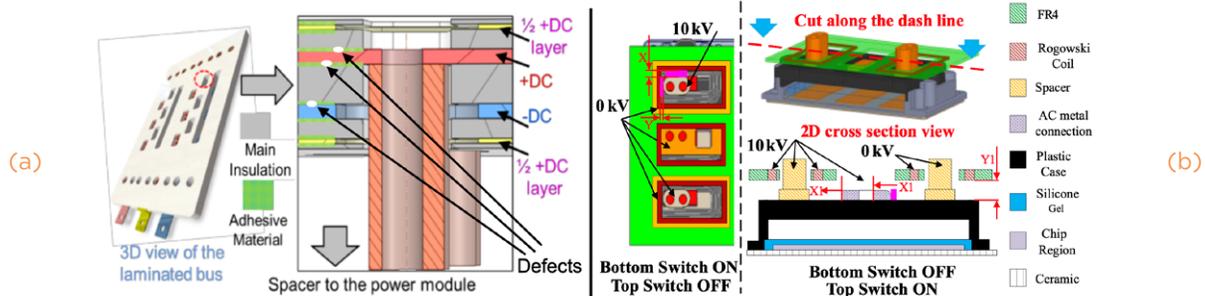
Examples of internal and surfaces insulation issues inside the PEBB 6000 assembly. (a) 2D cross-section view of the laminated bus with internal defects in the adhesive layer. (b) Electric field crowding regions on the exposed metal surfaces under varied switching status.
